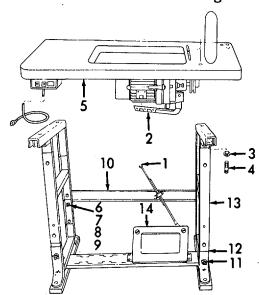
Darning Sewing Machine Table, Disassembly.
